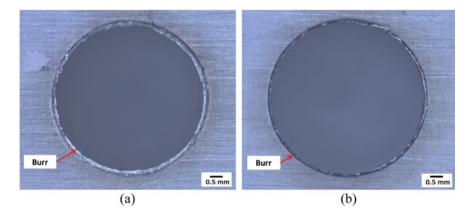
Titanium exit burr at hole 40 produced by a conventional drilling, and b UAD
